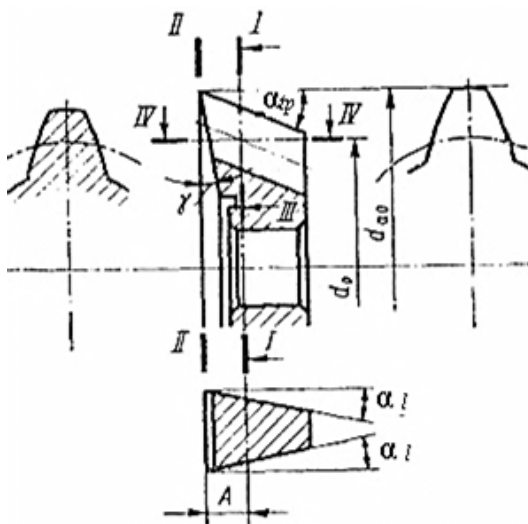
Geometrical parameters of a disc spur shaper cutter
